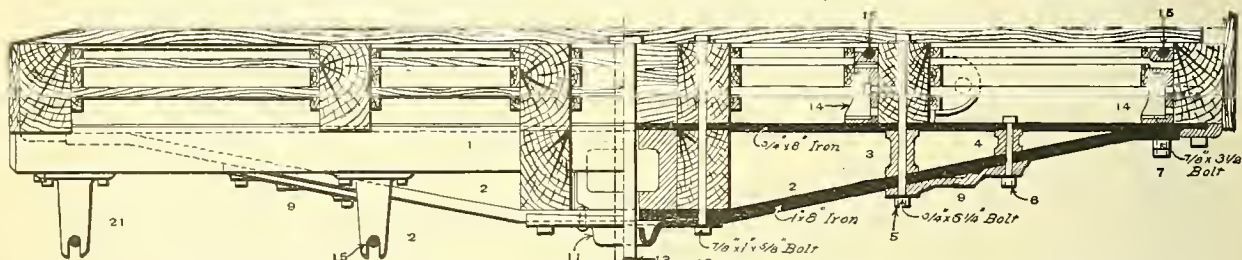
Transverse Section of Underframe of a Refrigerator Car and Half Elevation and Half Longitudinal Section of Bolster.
